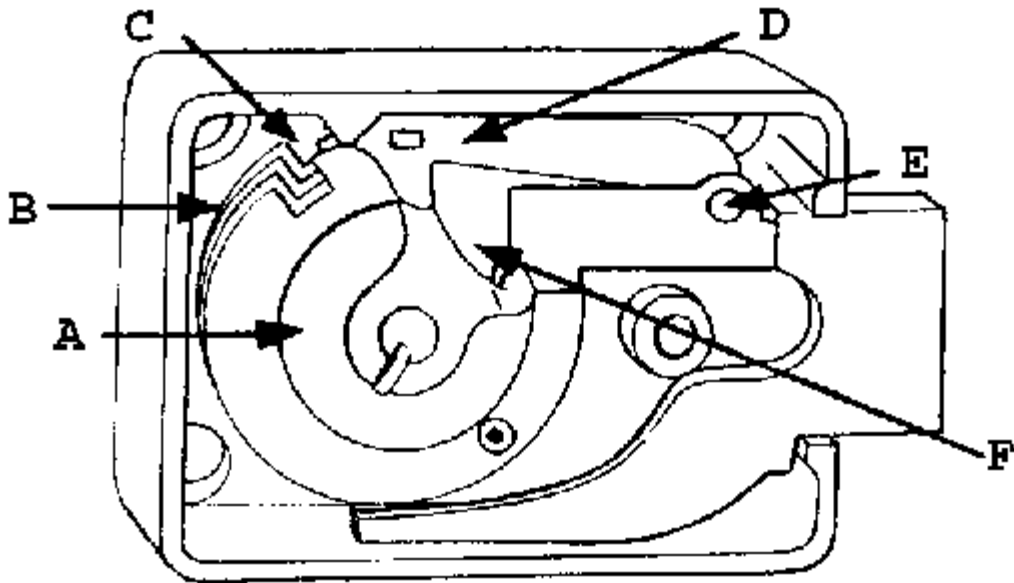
(A) drive cam, (B) tumblers or wheels, (C) wheel gatings, (D) lever fence, (E) lever screw or pin, (F) drive cam opening.
